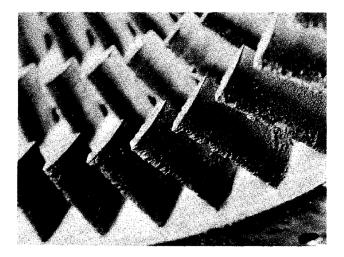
Axial-flow compressor stator blading showing oily carbonaceous deposits [90]
